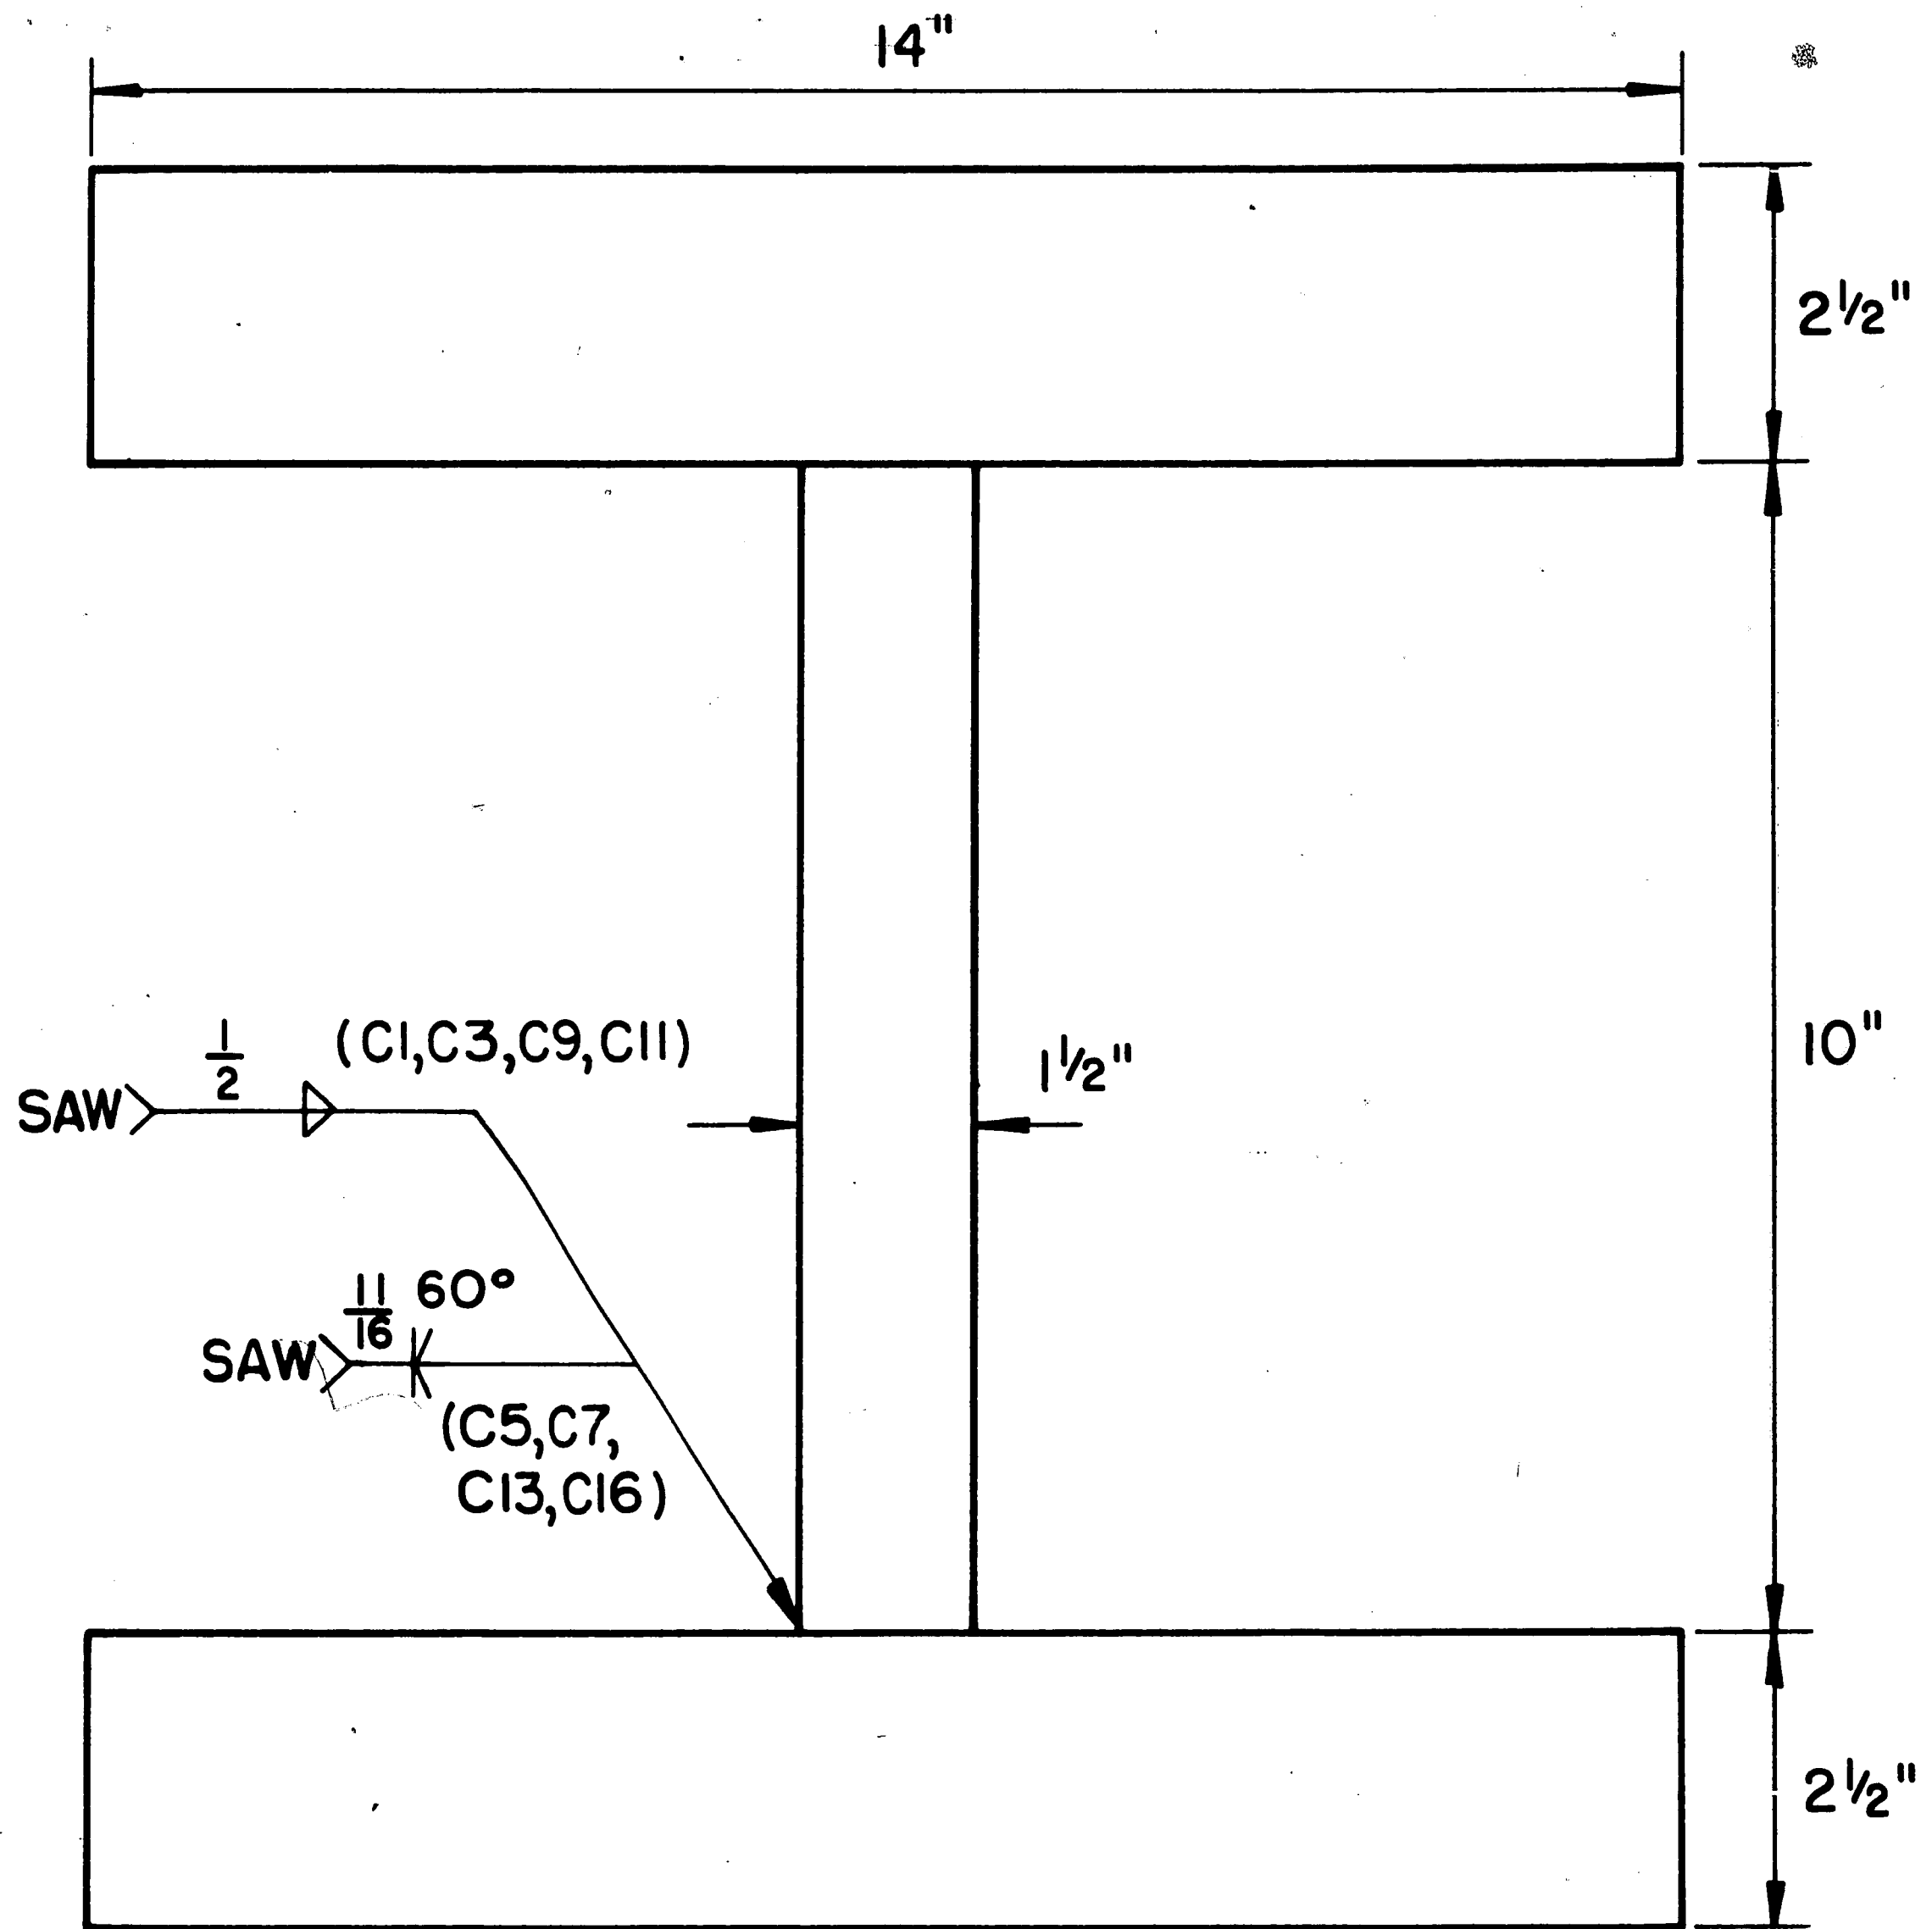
Dimensions Of Light Welded Shapes
